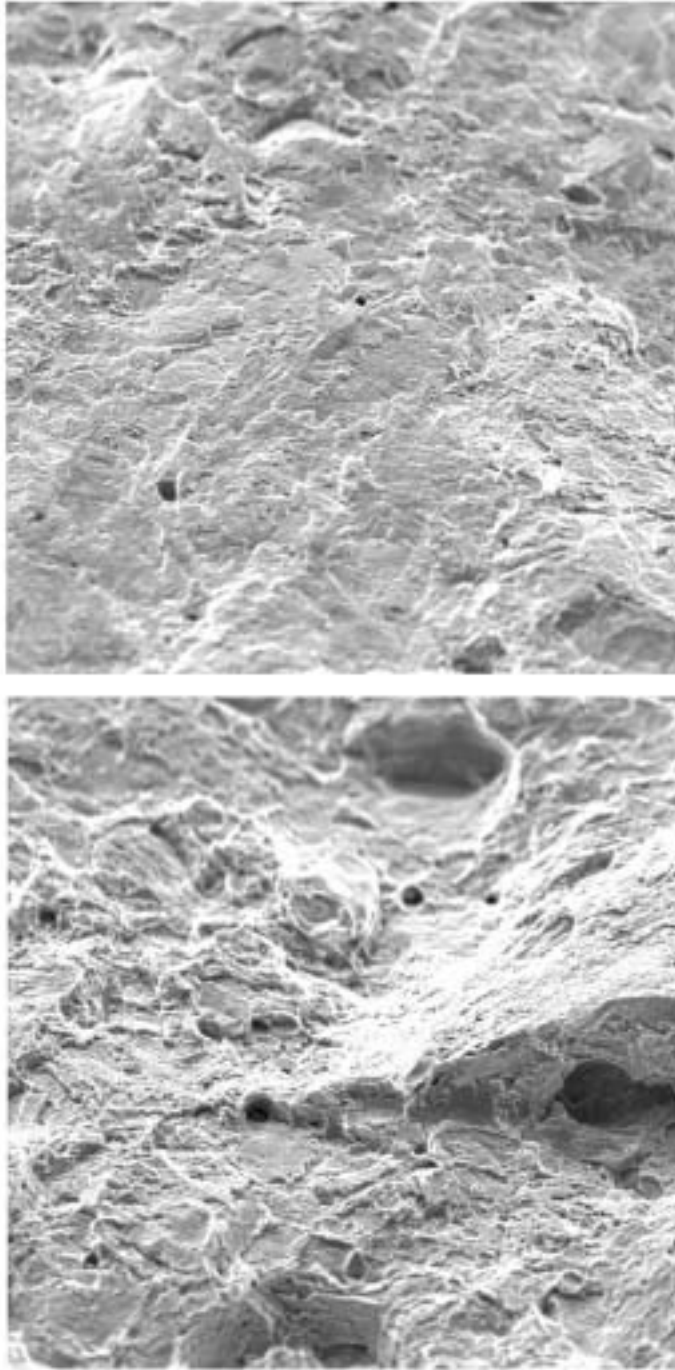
(continued). Fracture of the S1T5 Specimen Showing Channel Faceted Surface
